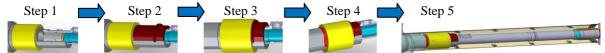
Representation of the device coupling steps and the protective cylindrical screen mounting
